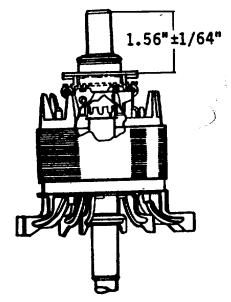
Shaft rotor assembly with centrifugal mechanism
